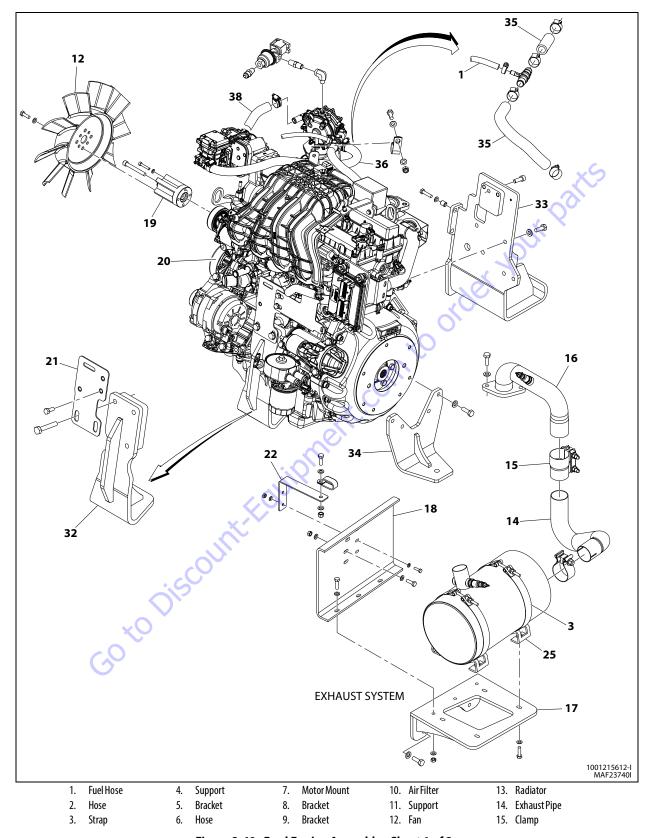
Ford Engine Assembly - Sheet 1 of 2
